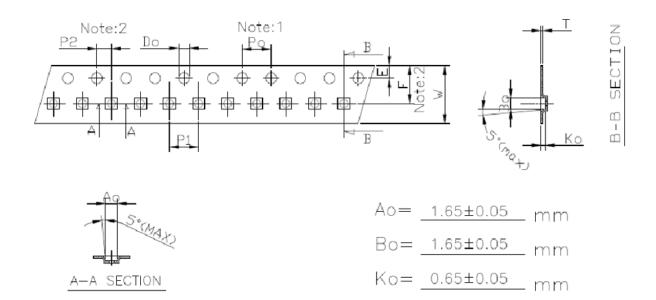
Tape and Pocket Drawing for LGA-4 Package
